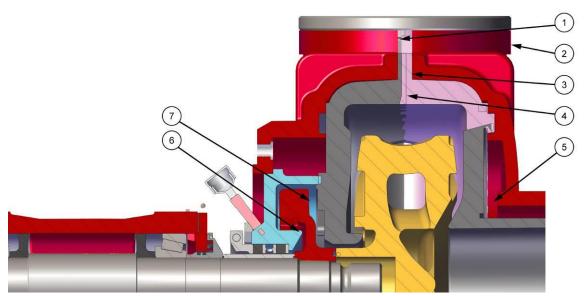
Three Part Integral Rubber. Fitting Frame Plate Liner, Cover Plate Liner, Throatbush, Impeller and Cover Plate.
